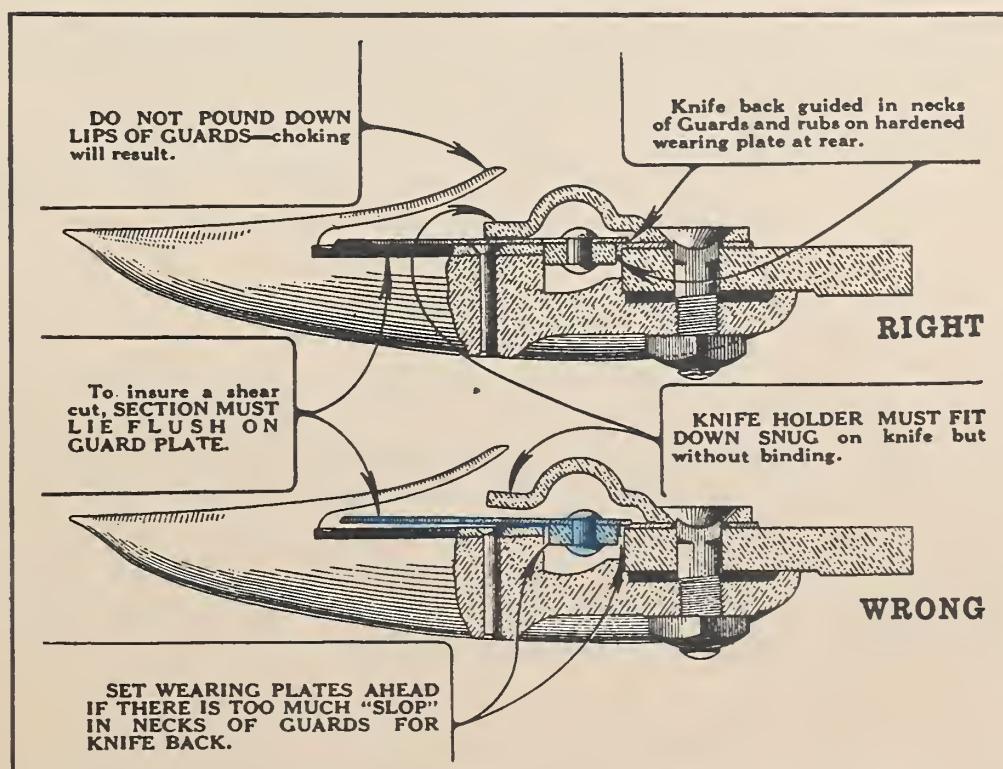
Right and wrong adjustment of knife to ledger plate.
